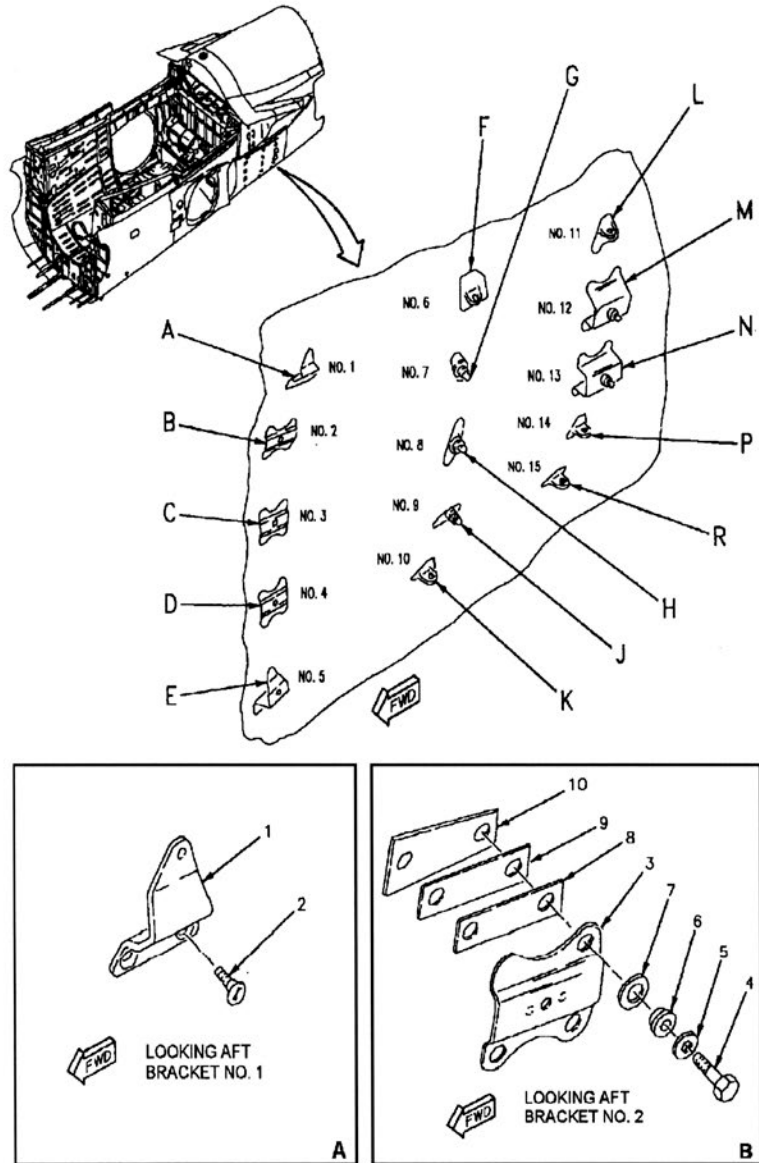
Heatshield Bracket Assembly, AV-8B-161573 thru 164547, TAV-8B-162747 and up (Sheet 1)
